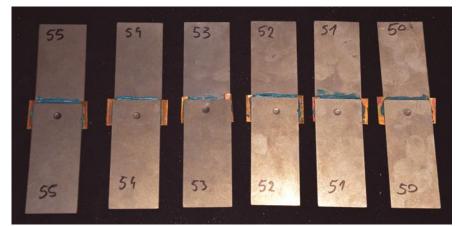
View of samples after application of adhesive and after spot resistance welding. Samples for shear test [14]
